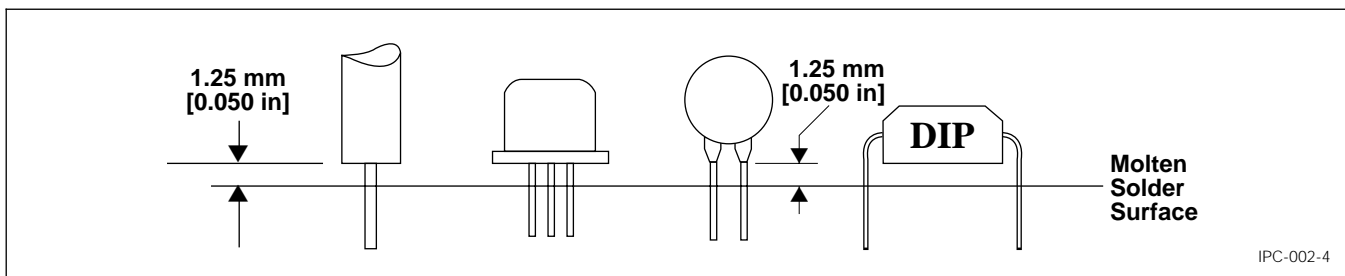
Solder Dipping Depth for Through-Hole Components
